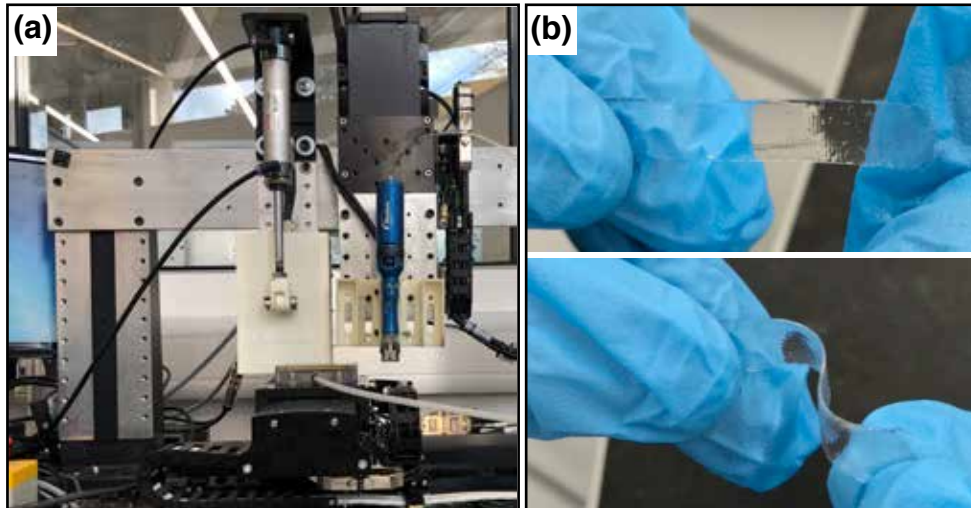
(a) The custom jetting setup used for 3D printing; and, (b) a printed 70/30 sample.
